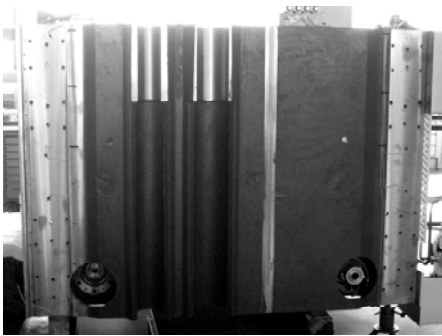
Rear side of headstock slider [Tos Varnsdorf]
